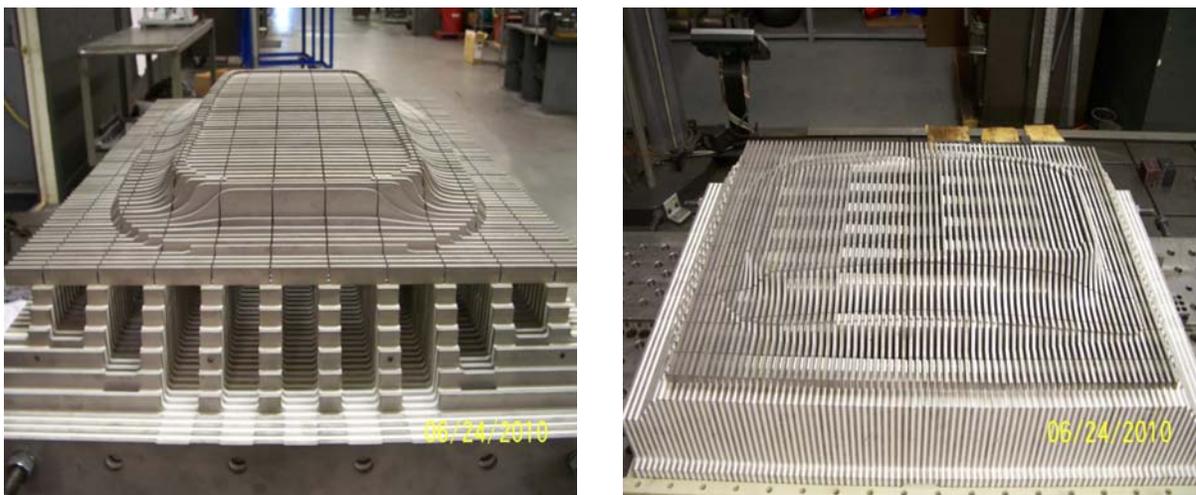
Picture of the assembled stainless steel tool body laminations for both the upper tool and the lower tool halves
